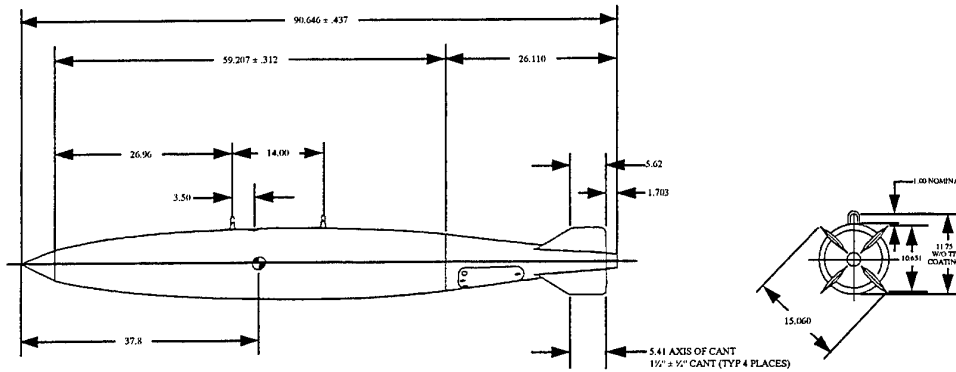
Layout of Mk 82 General Purpose Low Drag (GPLD) 500 lb bomb (all dimensions in inches)
